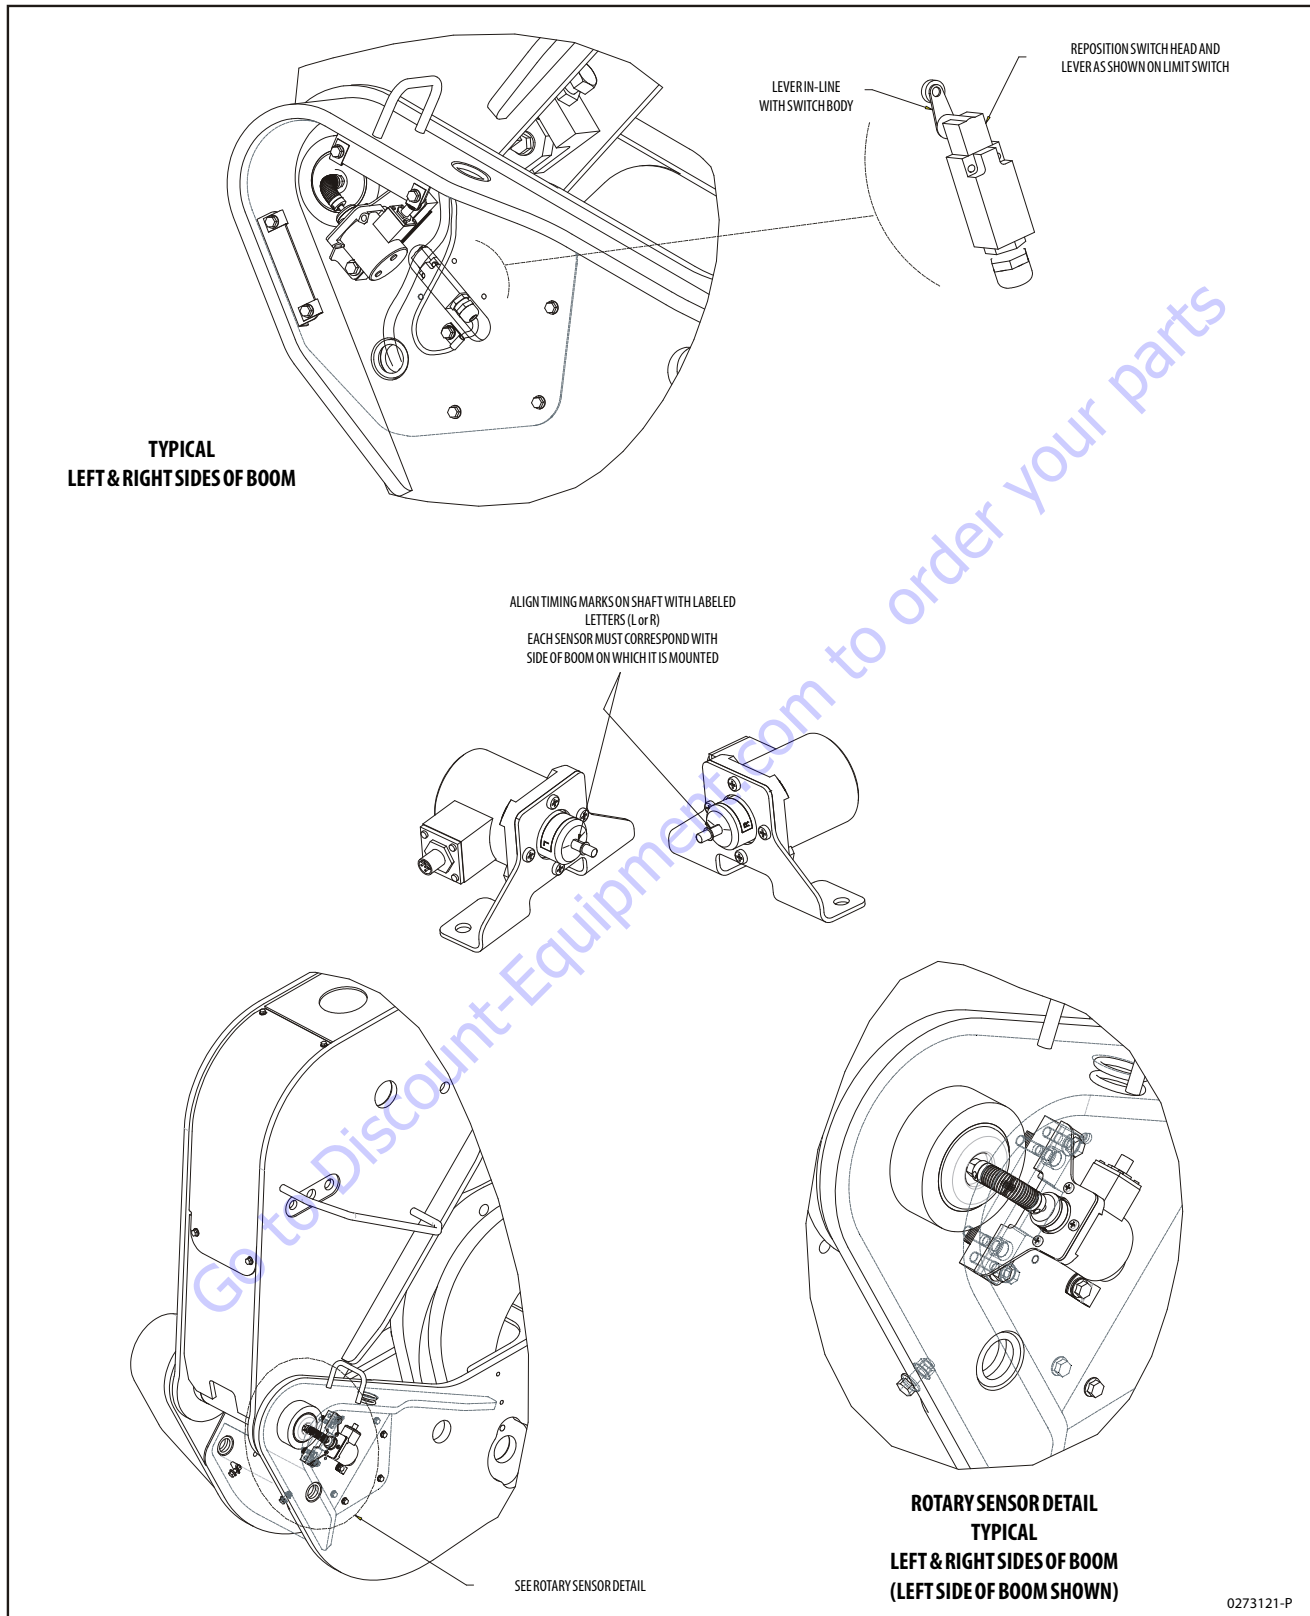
Boom Sensor Locations - Rotary Angle & Proximity Sensor - Sheet 1 of 2
